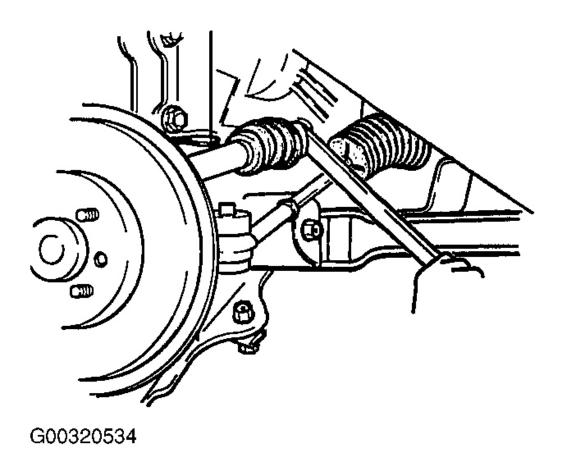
Removing The Drive Shaft From The Transaxle Housing Courtesy of KIA MOTORS AMERICA, INC.
